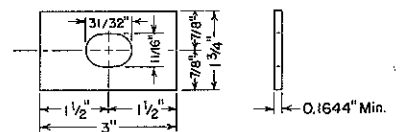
DETAIL OF INTERMEDIATE POST CONNECTION FOR 25' RAIL SECTION
